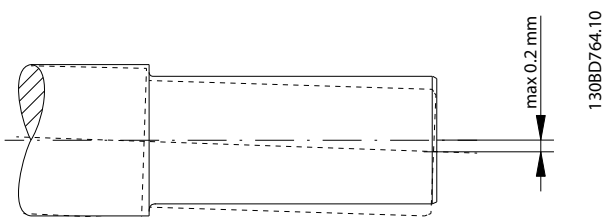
Maximum Allowed Eccentricity of the Conveyor Shaft
